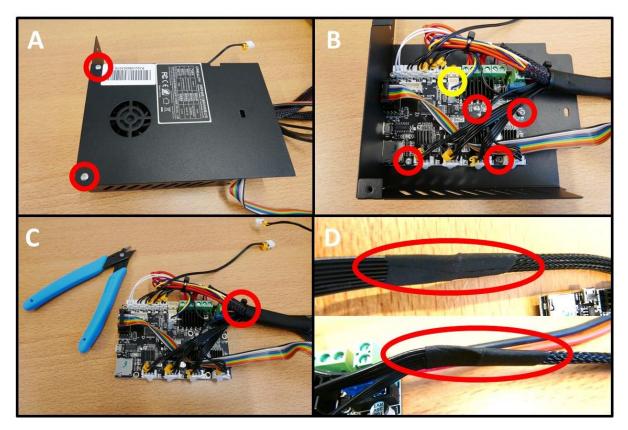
Freeing up the cable assembly to remove redundant cabling. A) Opening the Electronics Box. B) Removing the board mounting screws. Yellow circle indicates the removed fan connector. C) Cutting the zip tie. D) Removing the tape at the braid ends.
